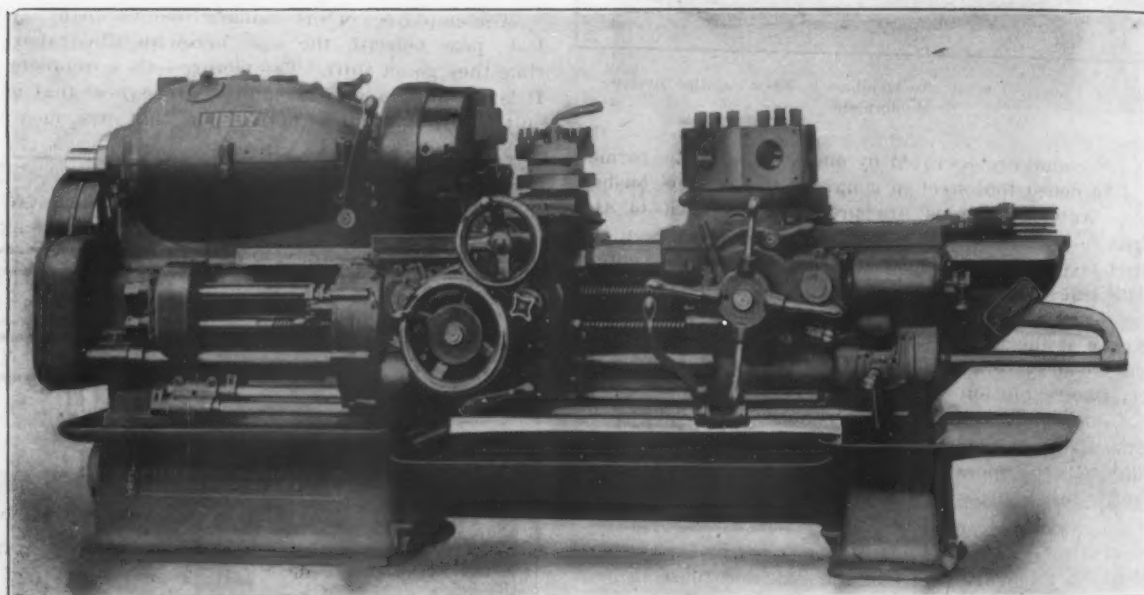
The Operating Side of the Libby 18-In. Turret Lathe Built by the International Machine Tool Company, Indianapolis, Ind.
